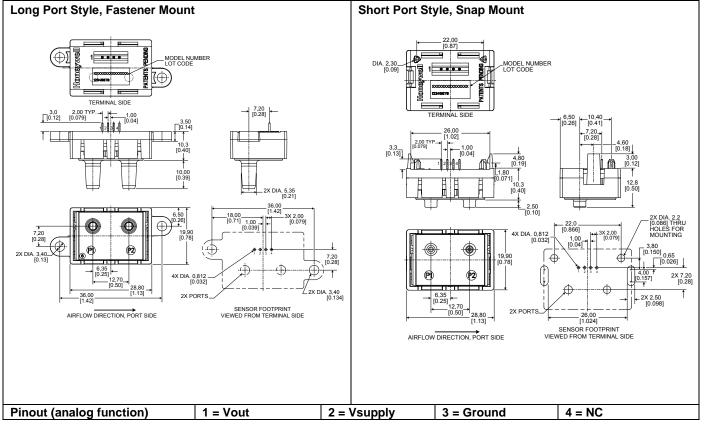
Mounting Dimensions (For reference only: mm [in]). Additional port and housing styles available.
